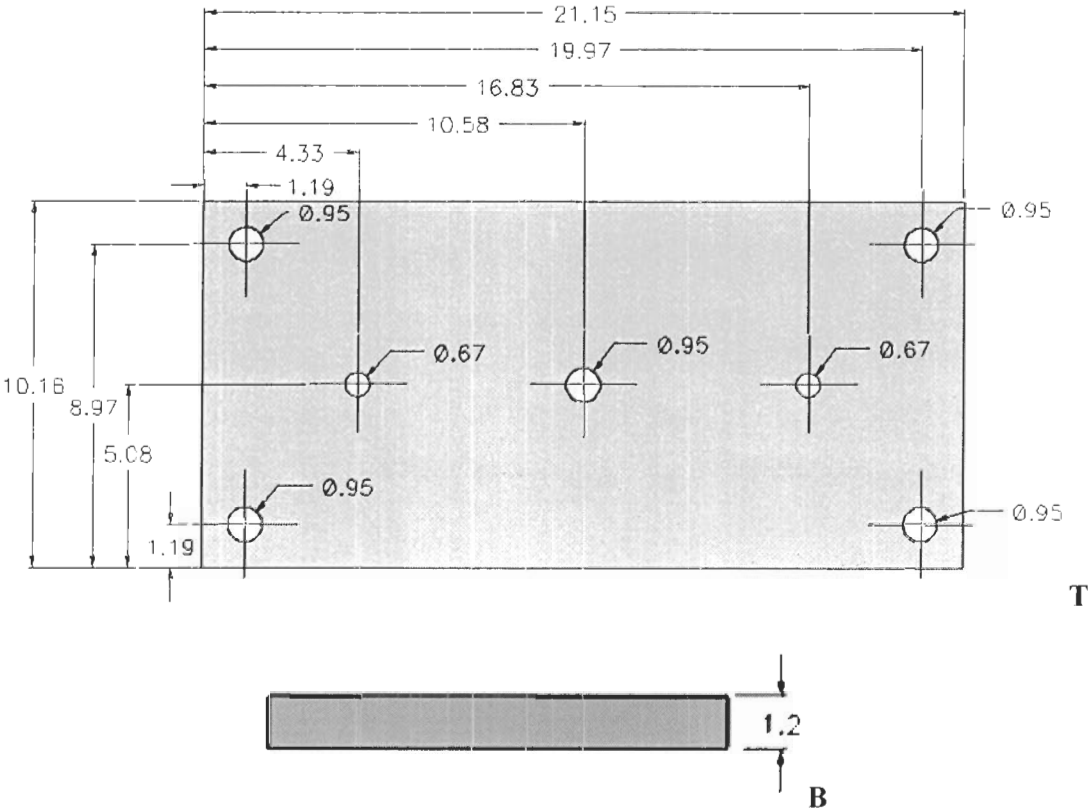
EFC Damper Test Jig Mounting Plate Top (T) and Front (B) Views with Dimensions in Centimetres
